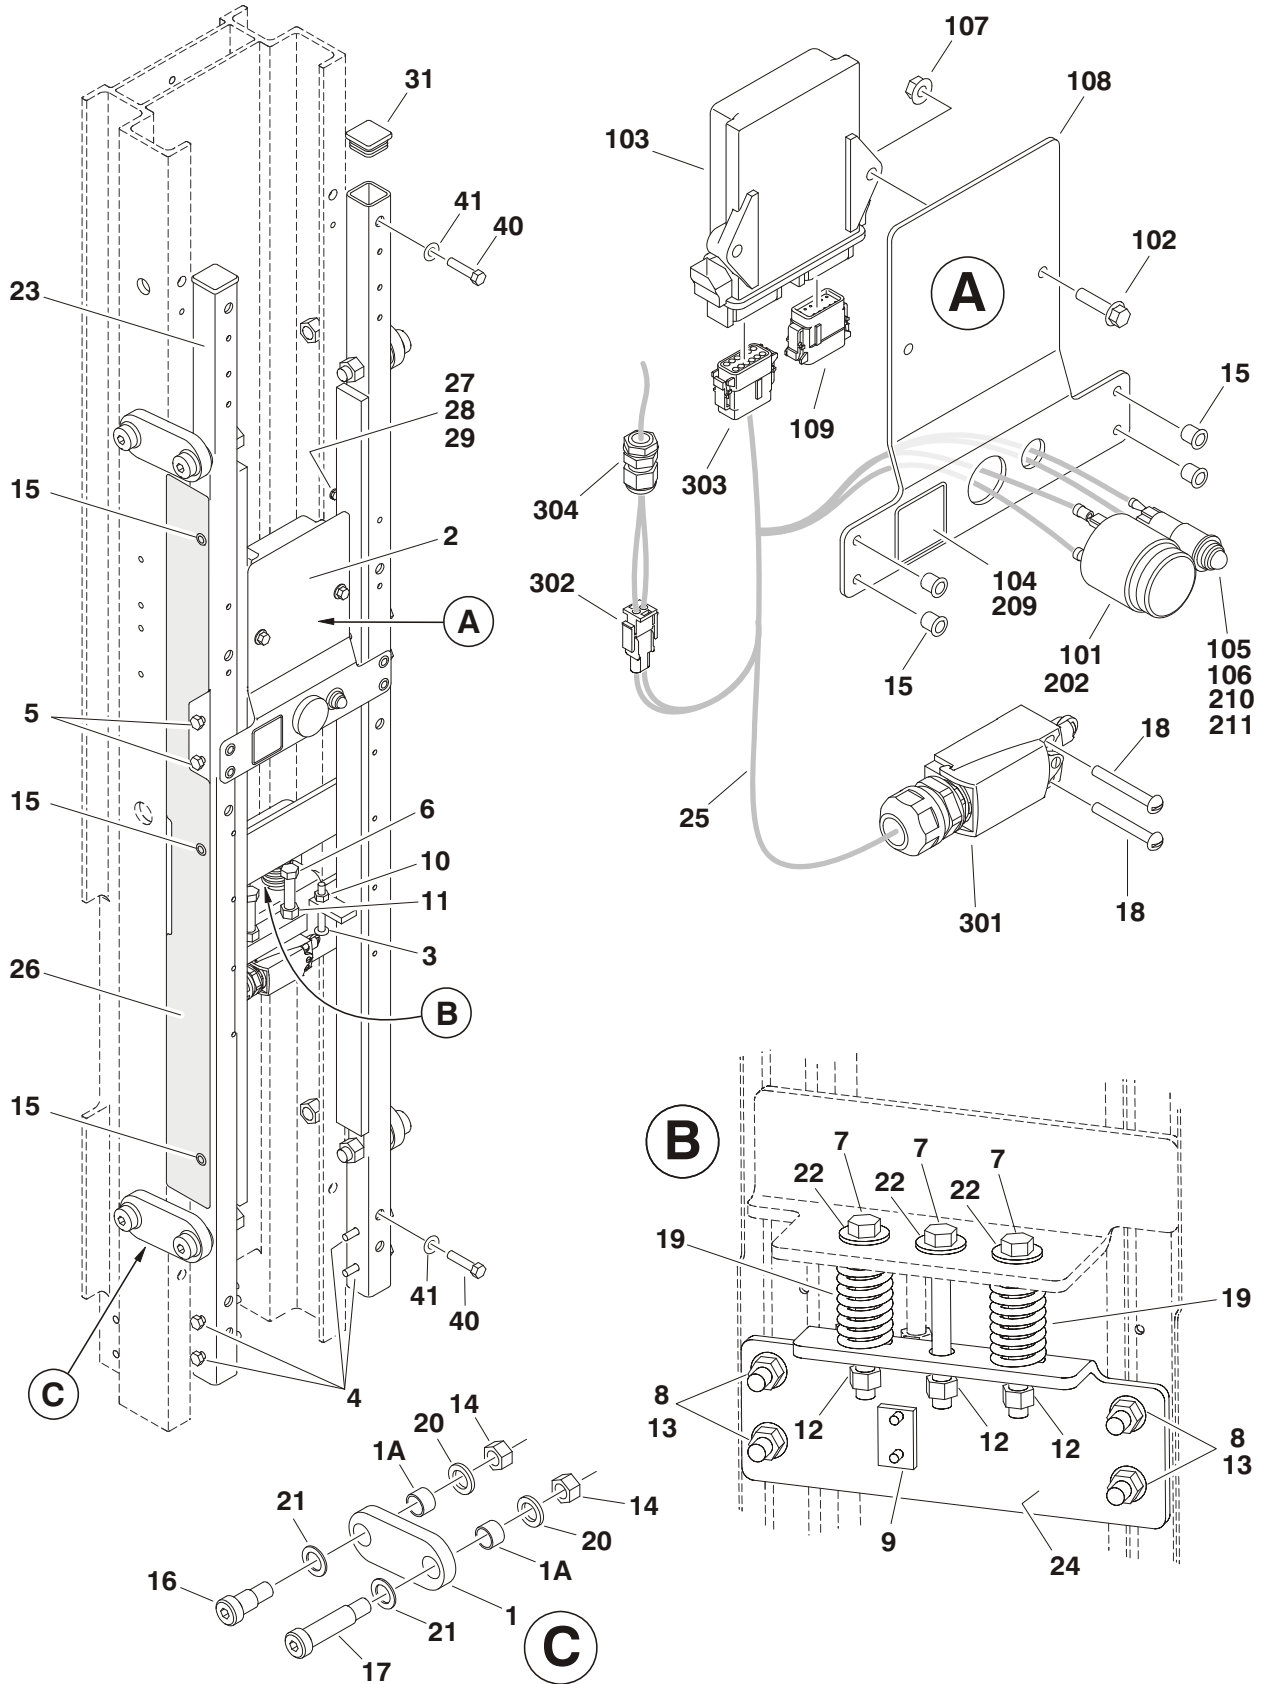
PLATFORM SUPPORT & LOAD SENSING INSTALLATION
